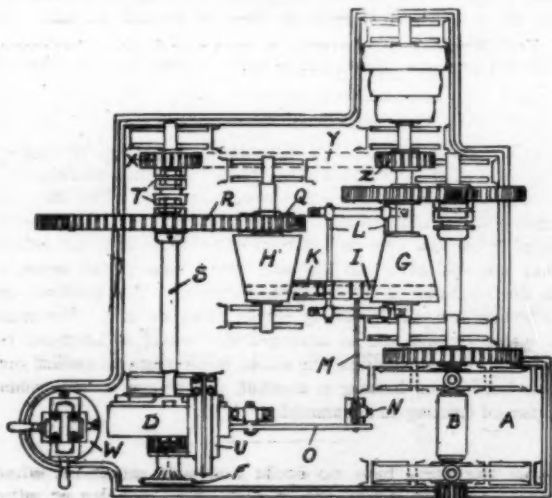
TOP VIEW OF BRIDGE TIRE MACHINE.
